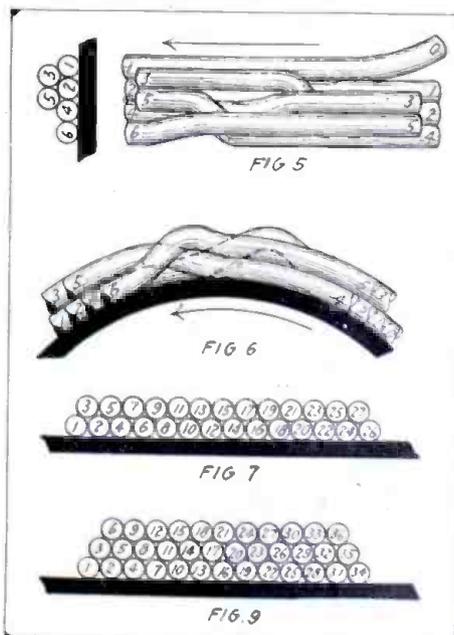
Shows the Fifth Turn Brought Over the Second Bend. A Side View of the Winding is Shown in Fig. 6. Fig. 7 Shows the Cross Section and Numbers of the Wires as They Lie on the Coil for a Two-Layer Winding. Fig. 9 Shows a Cross-Section of a Three-Layer Winding.
